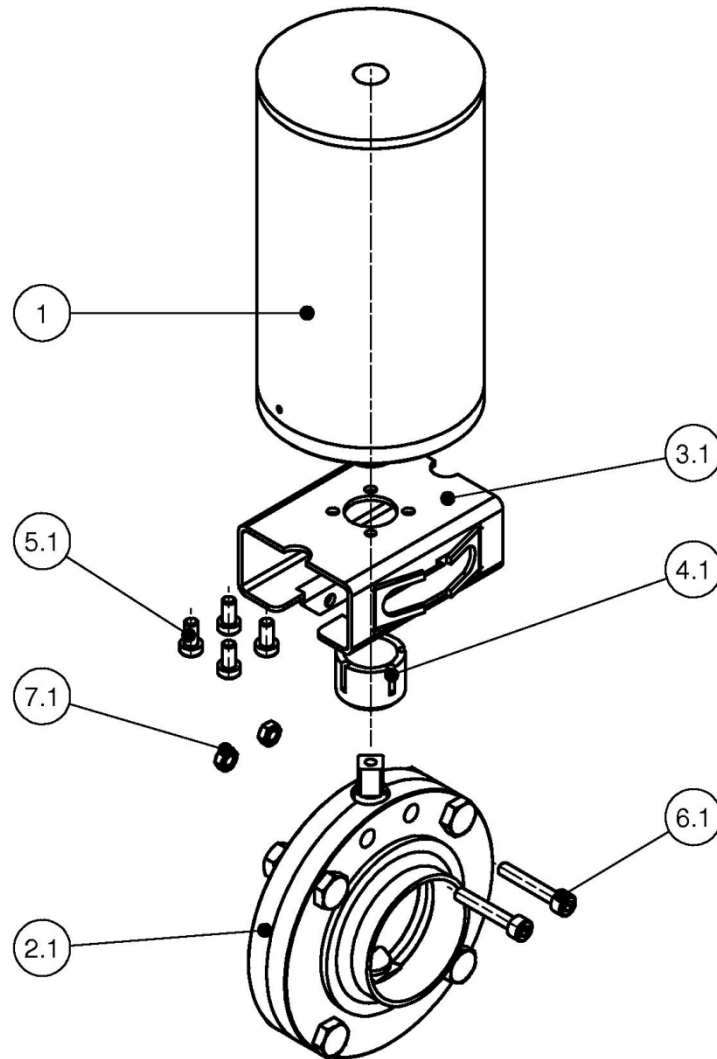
Pneumatic actuator PAMS with butterfly valve type SV04
